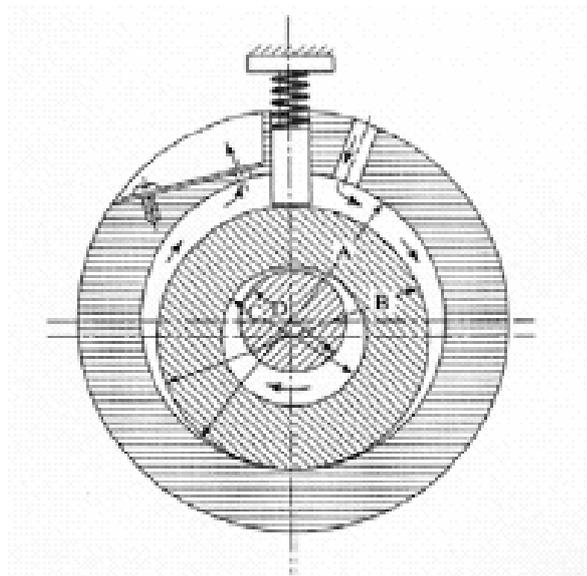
Schematic of a rolling piston type, rotary compressor
